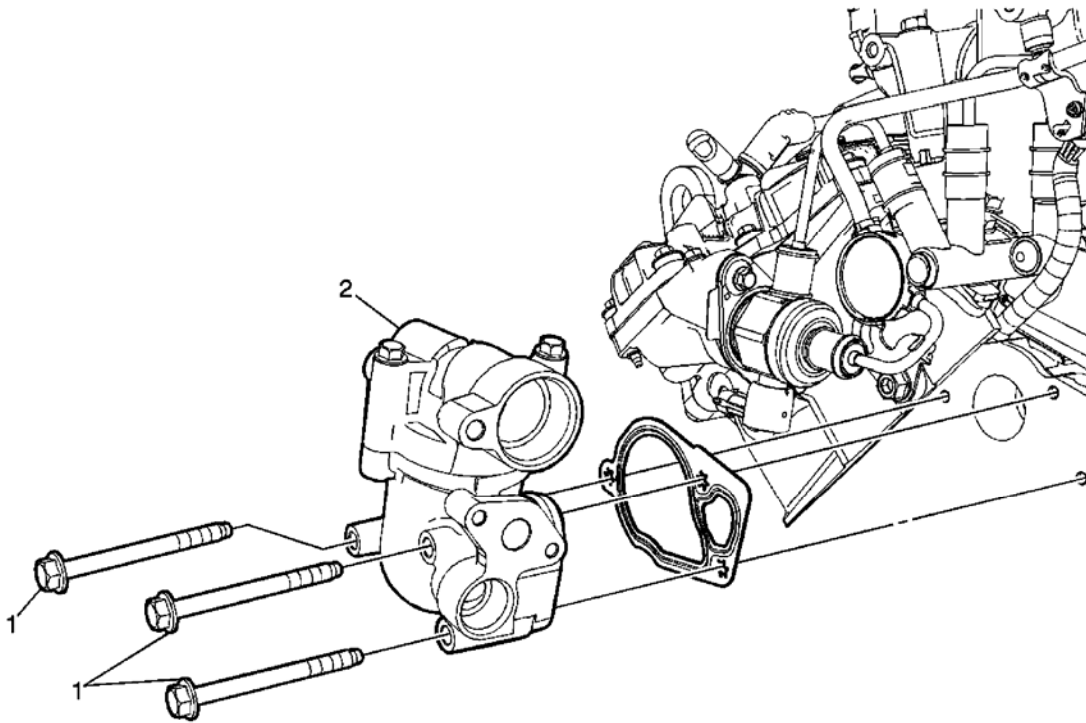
Engine Coolant Thermostat Lower Housing (LLT)
